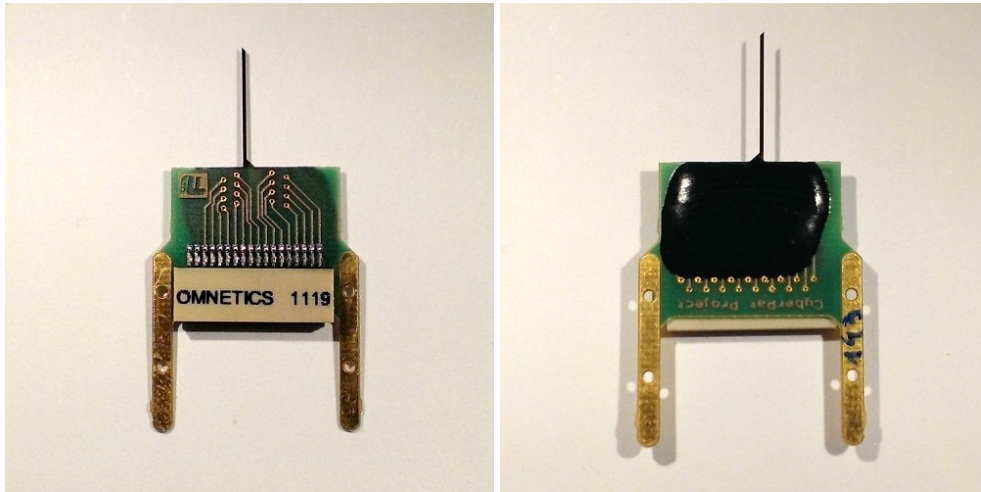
Photo of a C-100-A/EOSFET needle bonded to its PCB board.
